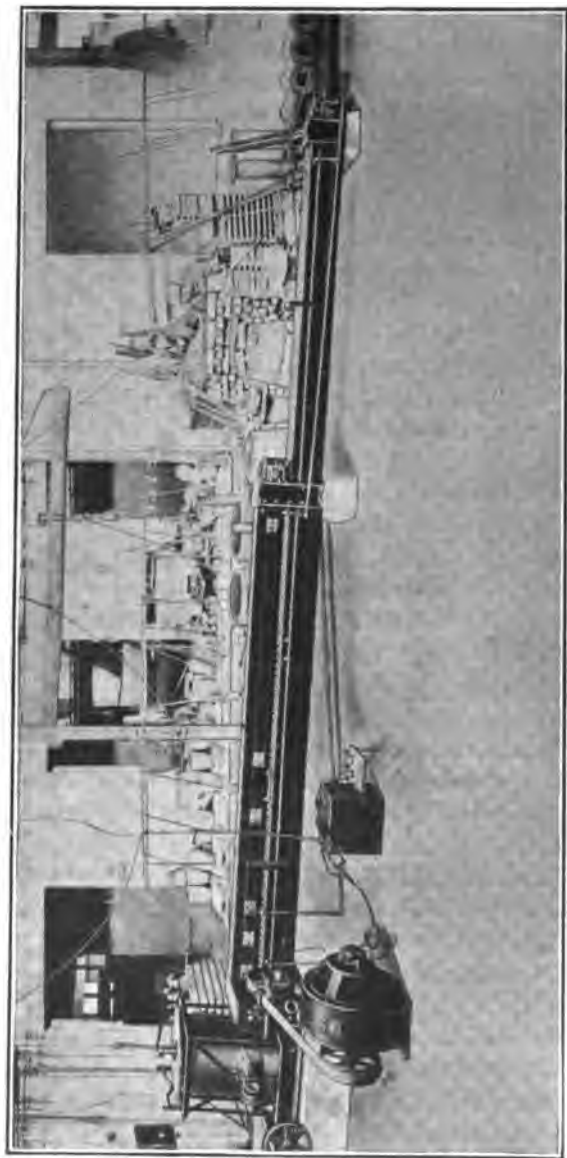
THE HORIZONTAL TYPE OF MELLEN ROD MACHINE FOR LEAD AND ALUMINUM.
